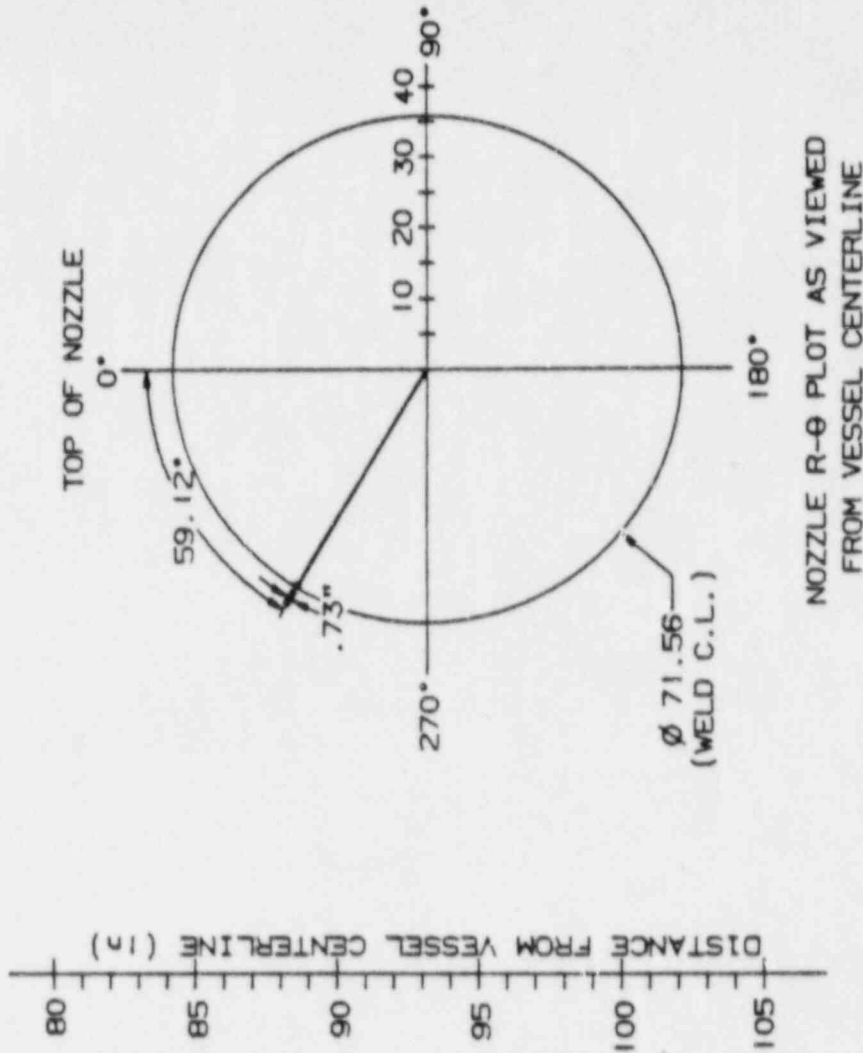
LOCATION OF INDICATION 2CC IN OUTLET NOZZLE TO SHELL WELD
